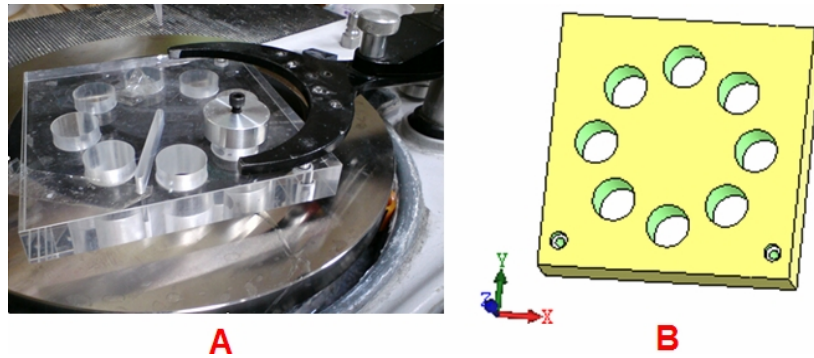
Real object and 3D plot of the 8-hole acrylic work cylinder holder for default swing jig arm
